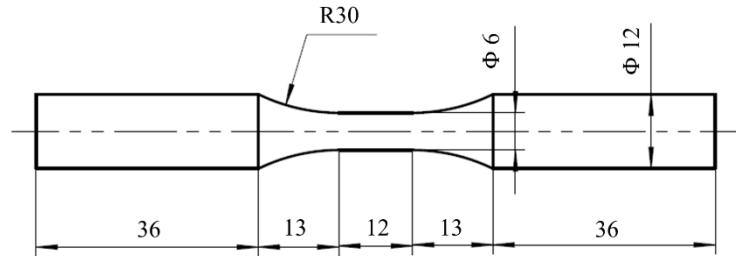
Shape and dimensions of the cylindrical specimen used for low cycle fatigue tests.
